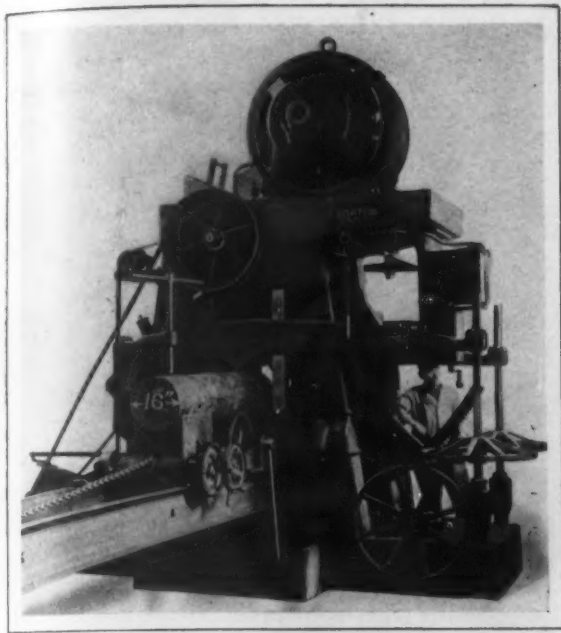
Front View with Bar in Place on the Stock Trolley Ready to Be Cut Off
